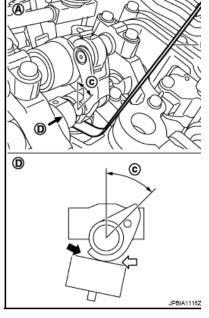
Checking Position Of Drive Shaft Nose Courtesy of NISSAN MOTOR CO., U.S.A.
